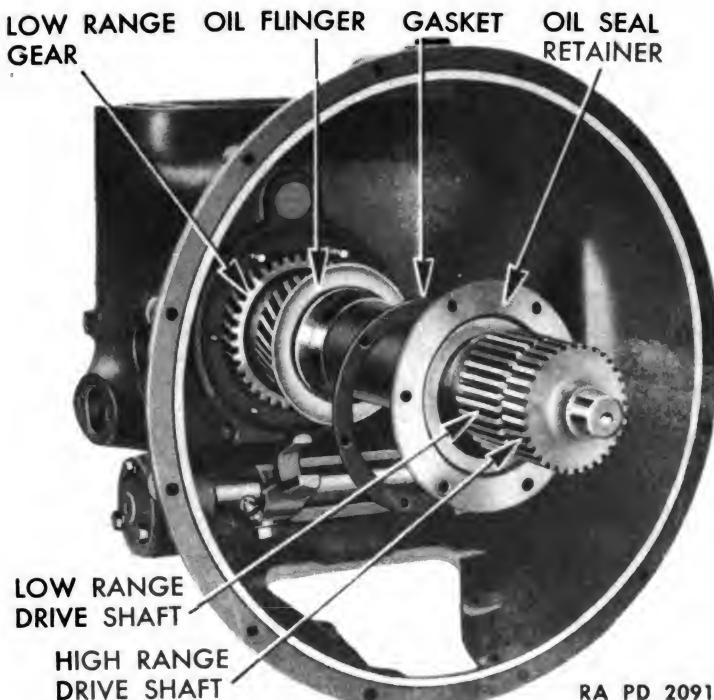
High and Low-Range Drive Shafts Partially Removed
